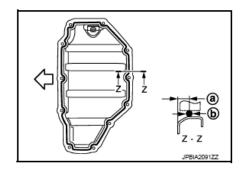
Identifying Liquid Gasket Applying Dimensions Of Oil Pan (Lower) Courtesy of NISSAN MOTOR CO., U.S.A.
